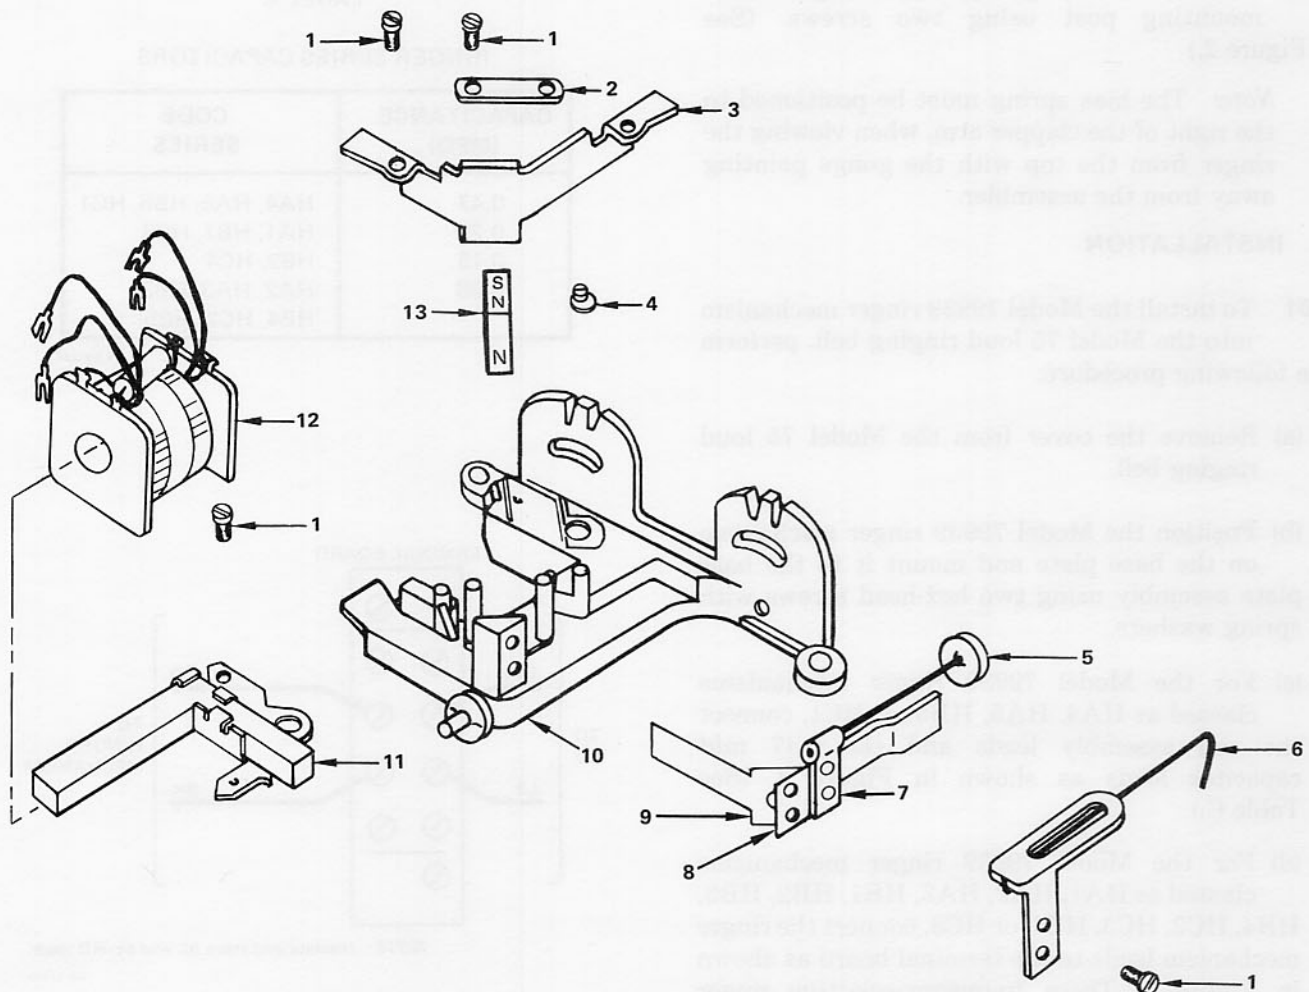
Model 79939 Ringer Mechanism, Exploded View
